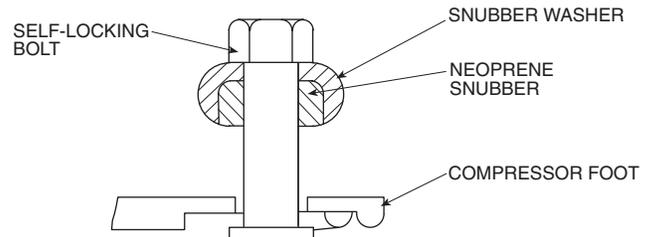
A — Compressor Mounting — 575B072 and 575C090,120 Units
